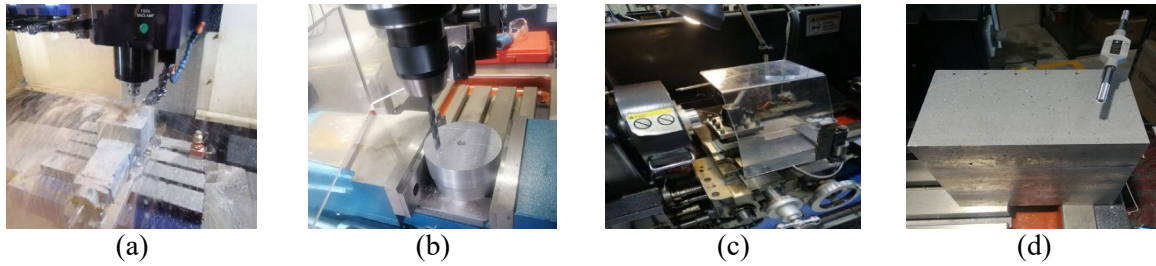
Machining process; (a) Create pocket using CNC machine, (b) Drill hole using Conventional Milling, (c) Taper angle for compression mechanism using Conventional Lathe, (d) thread manually created
